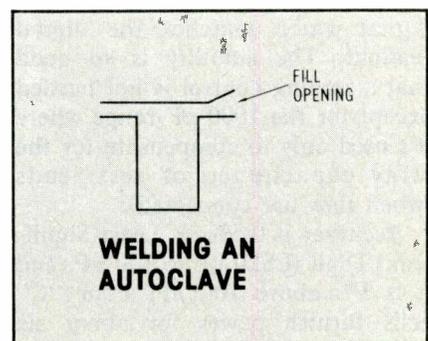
How can a reader weld the opening remaining at the top of this cylinder which is to be used in an autoclave?
